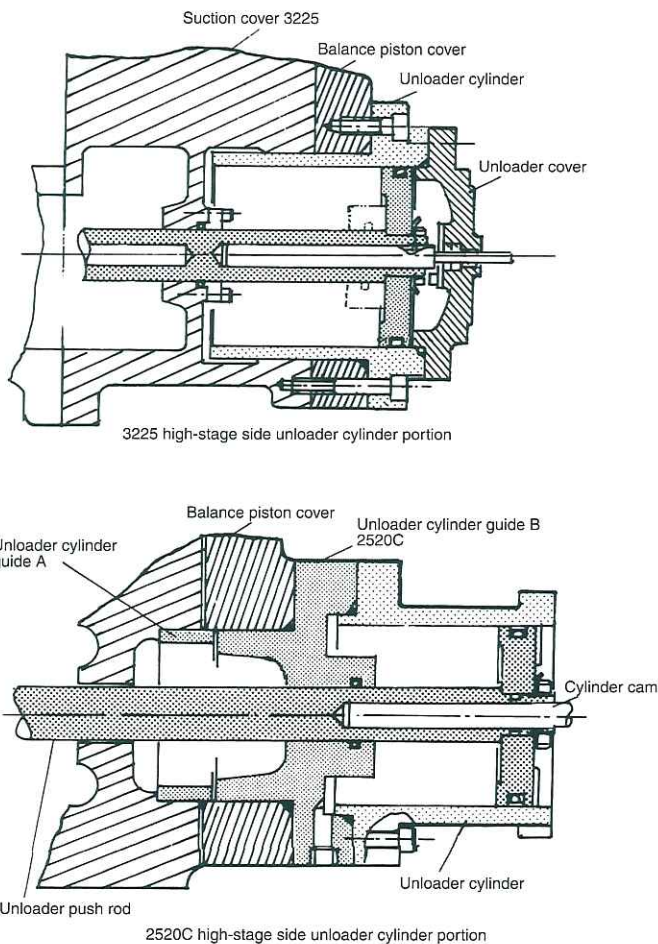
High-stage side Unloader Cylinder Fitting Section, Sectional View
